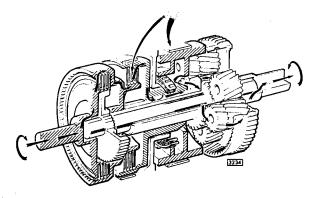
Mechanical power flow — Reverse gear (R) selected
